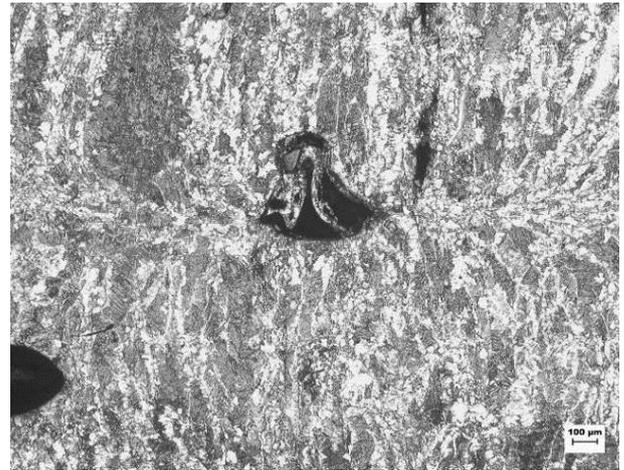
Microstructure of weld nugget with cavities; steel sheet of thickness 2.5 mm
